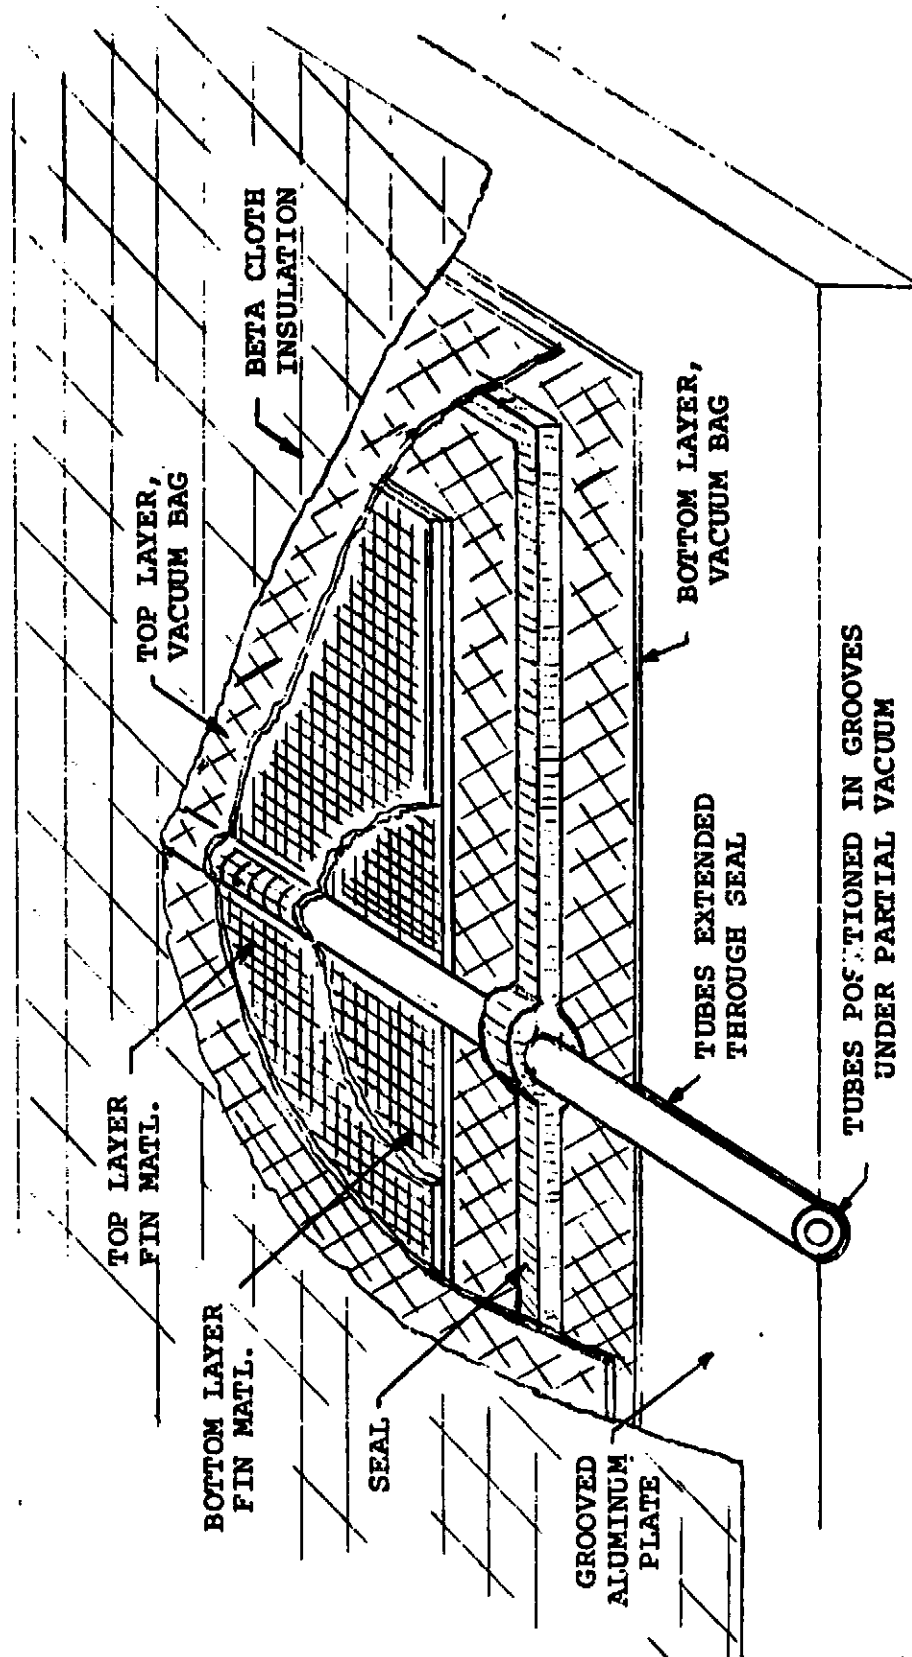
ASSEMBLY FOR FUSION BONDING RADIATOR
